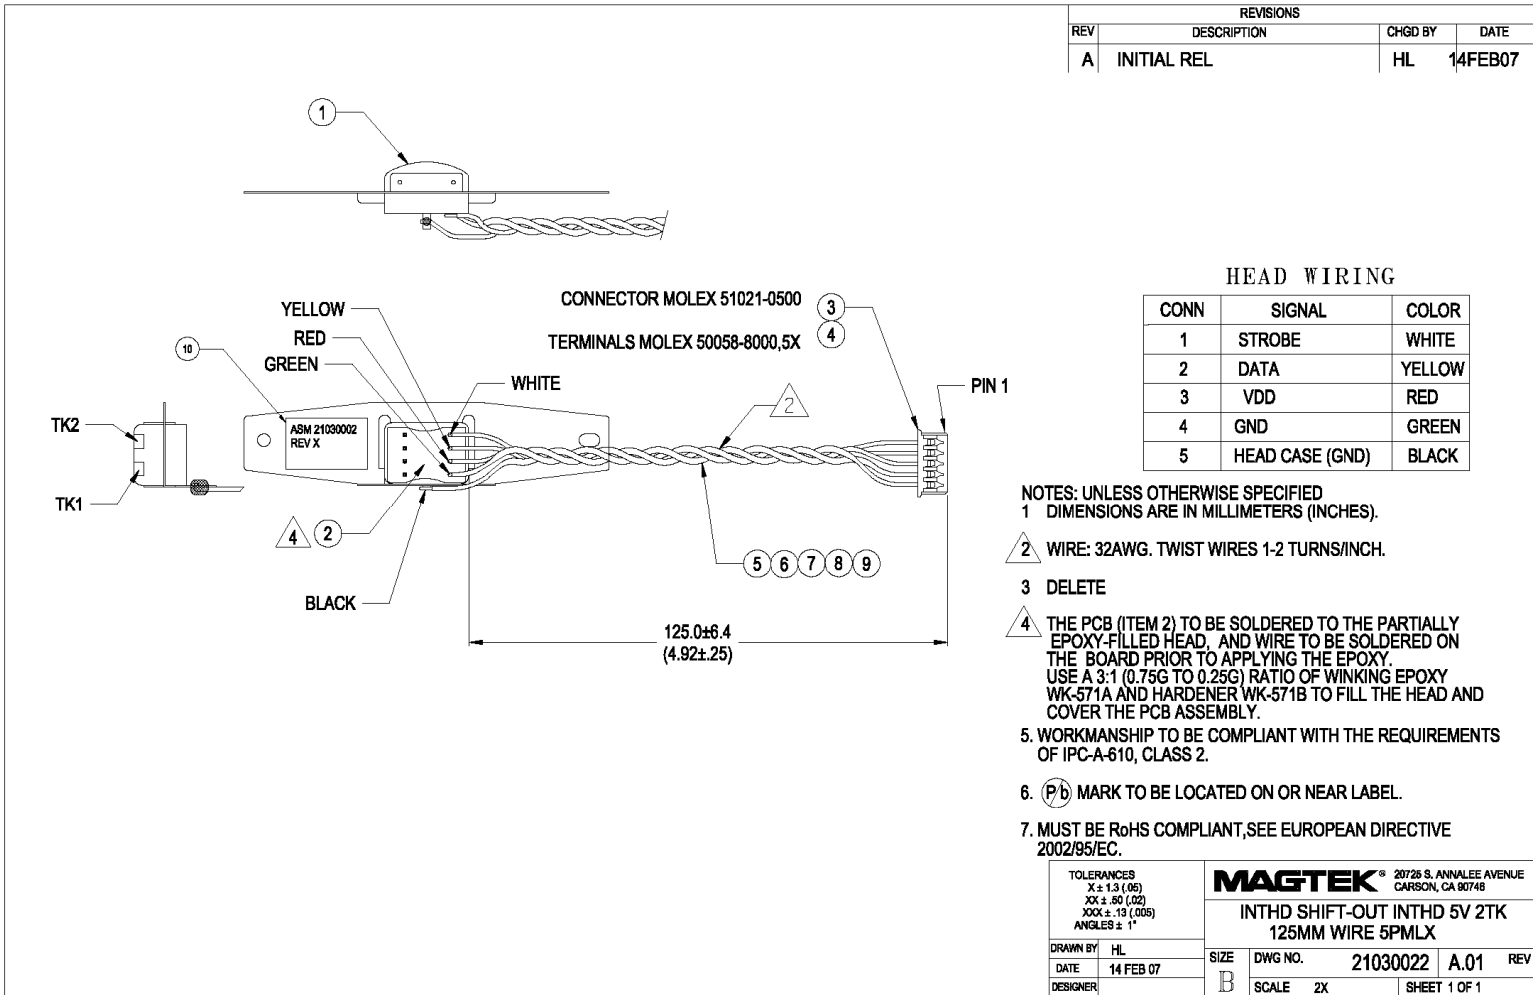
Two-Track 5V Shift-Out IntelliHead, 125mm, Wire 5PMLX, Butterfly Spring
